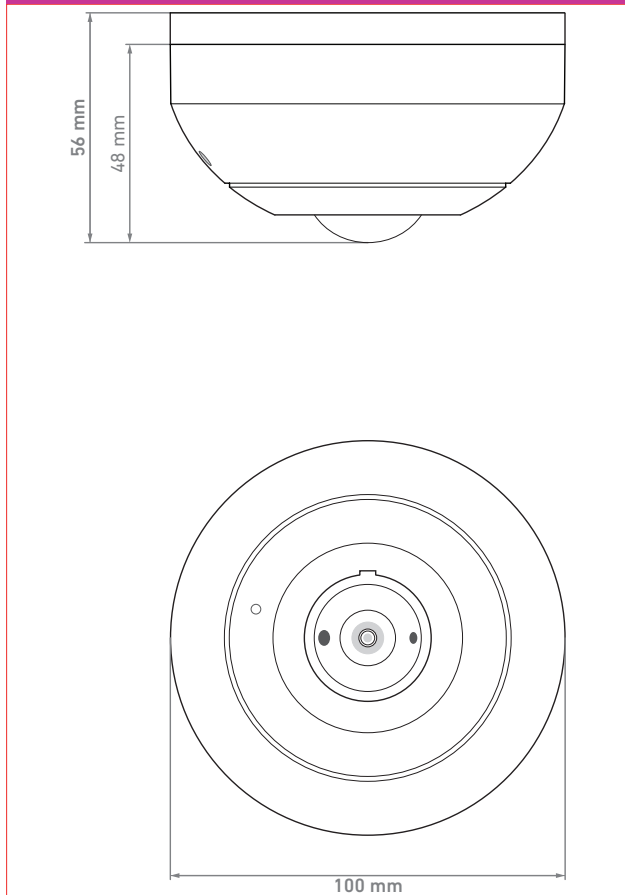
Open-Area VAD (C-3-8) with XPERT 7 Mounting Base Dimensional Drawing
